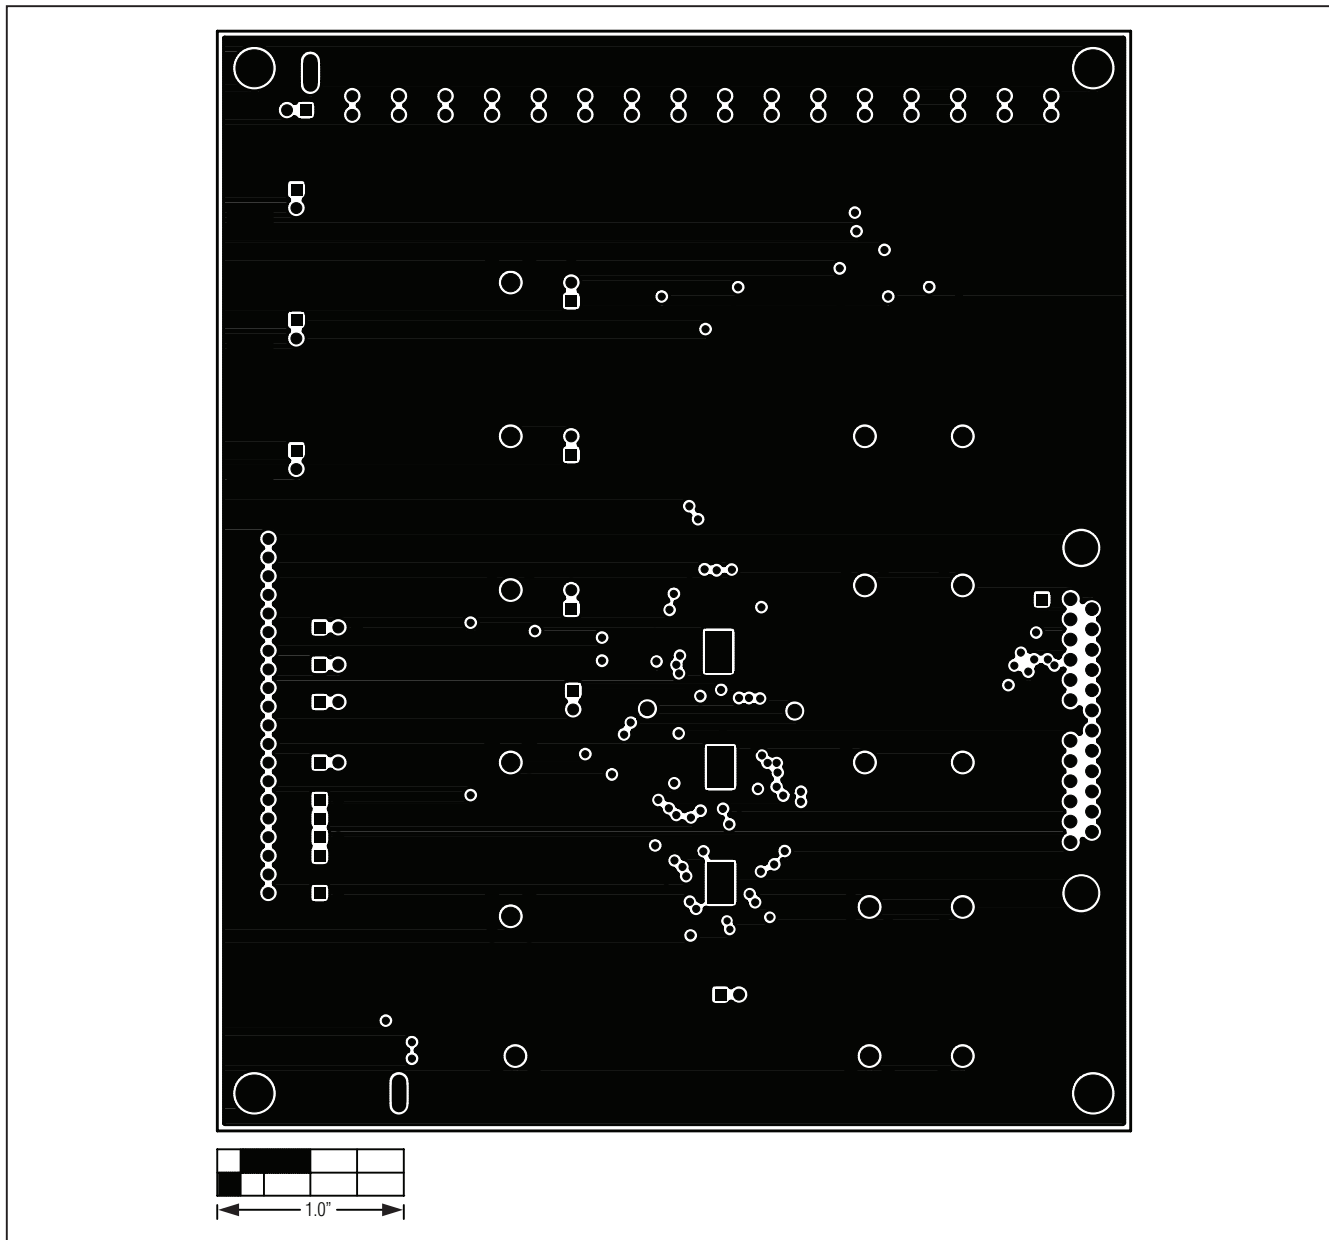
MAX13171E/MAX13173E/MAX13175E EV Kit PCB Layout—Inner Layer 2
